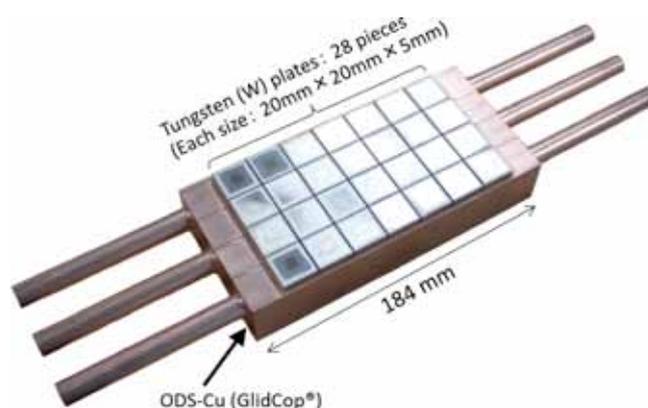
A large-scale divertor mock-up fabricated using 28 tungsten plates bonded to an ODS-Cu block.
